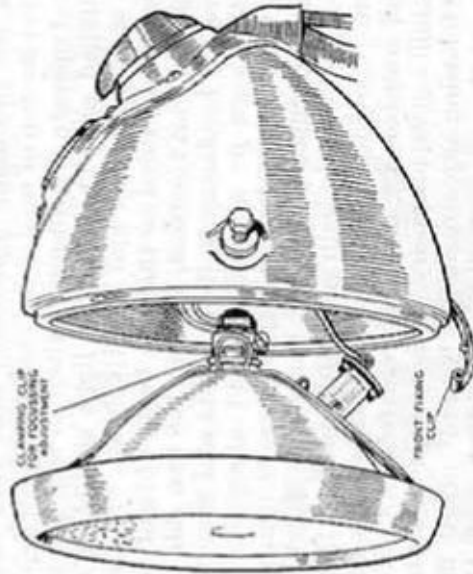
FOCUSING ADJUSTMENT ON LUCAS DU-42 HEADLAMP
